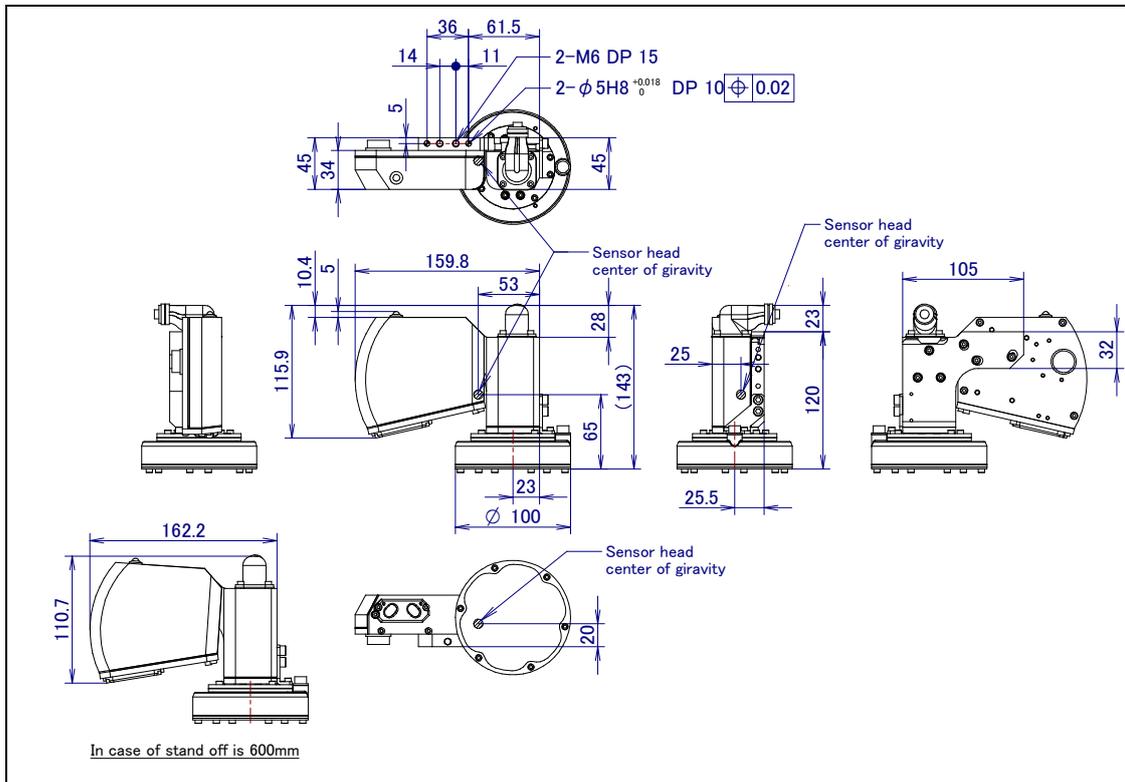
(b) External dimension of the 3D Laser Vision Sensor Head (with LED light)
